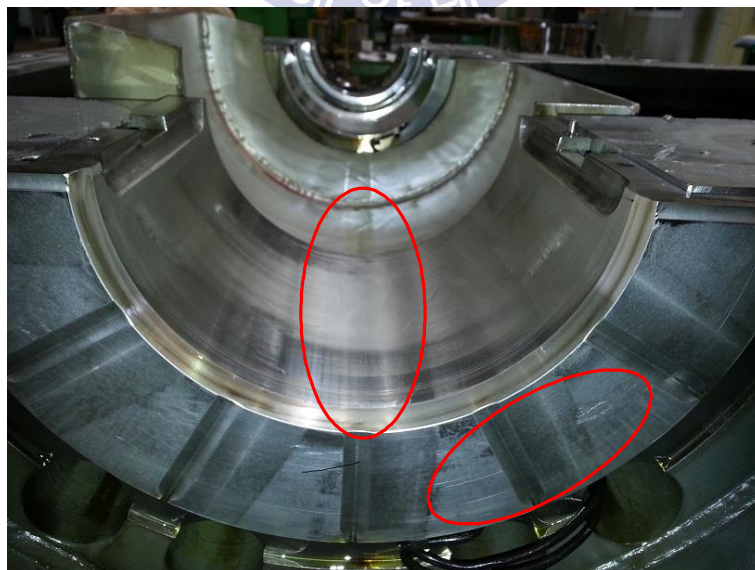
Pinion output side bearing damage and scratch⁵⁾
